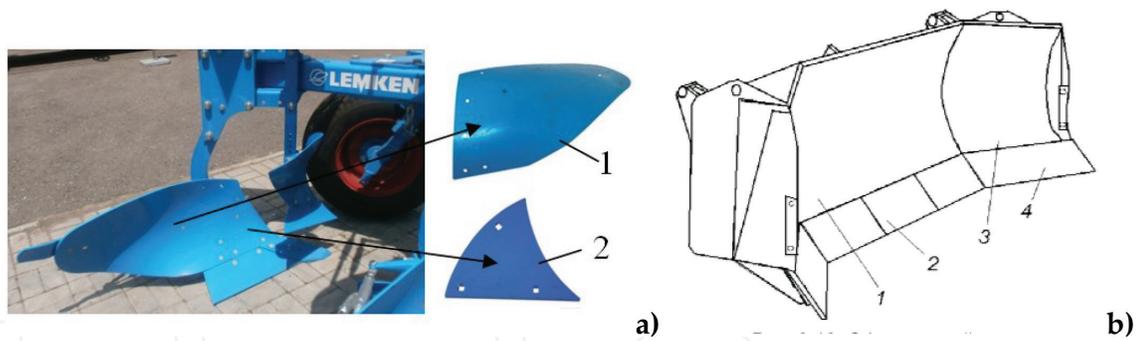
Sectional construction of plow (a) and bulldozer (b) mold board: “1—wing” and “2—breast” of plow’s body; “3—frontal” and “4—side” sections of spherical mold board of bulldozer.
